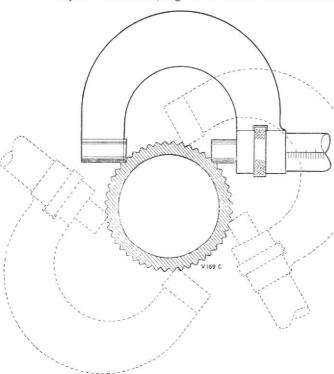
Using a micrometer to check the external serrations of the accessory drive shaft.
